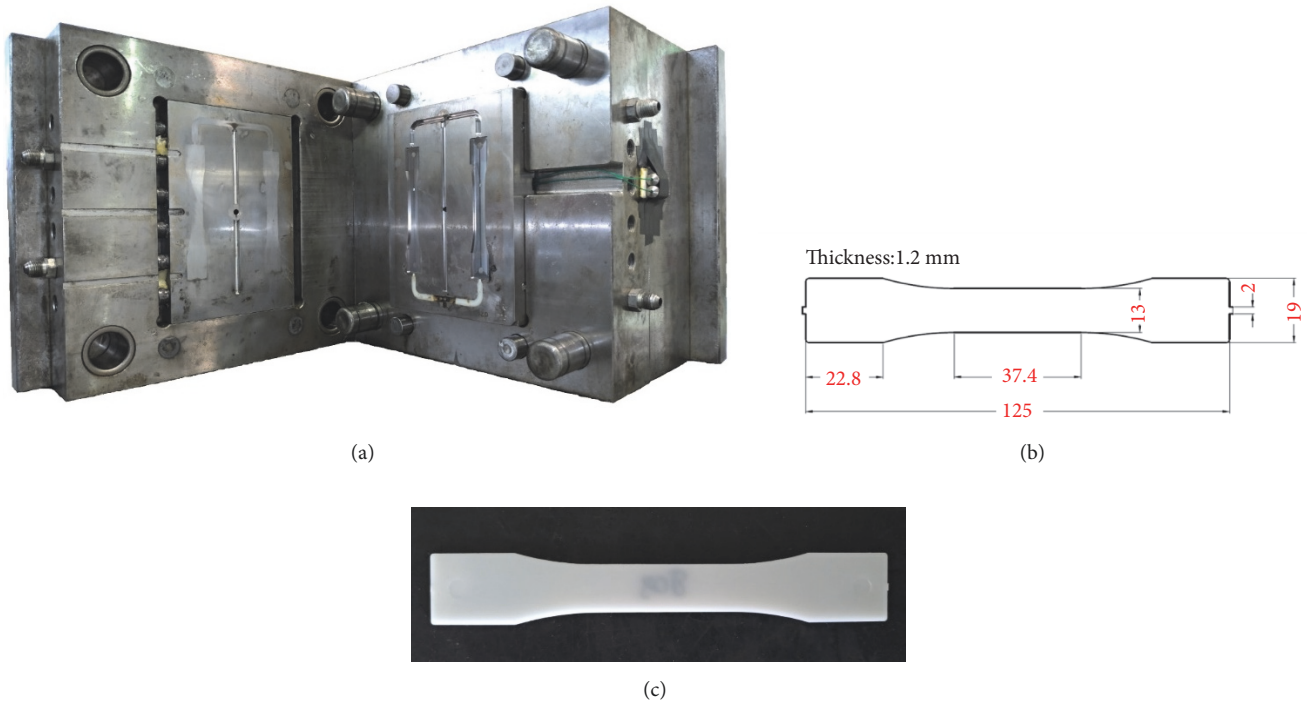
(a) Photograph of dual-cavity injection mold, (b) geometrical dimensions of dumbbell specimen, and (c) photograph of injection-molded part.
